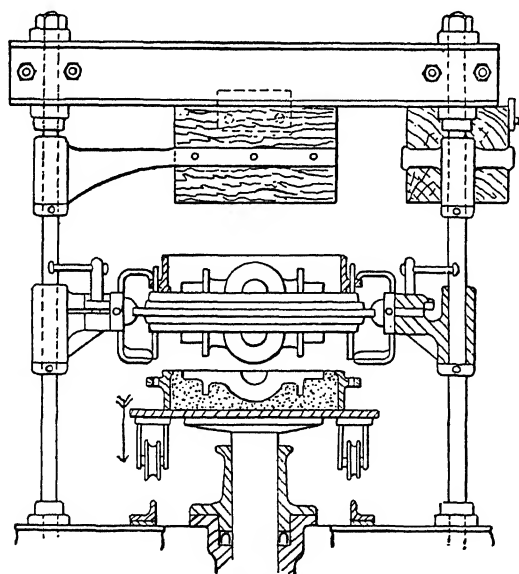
Turn-over Table Machine, with presser head above and carrying-off table that runs on tracks below. Pattern parts are mounted on plate attached to the table.
